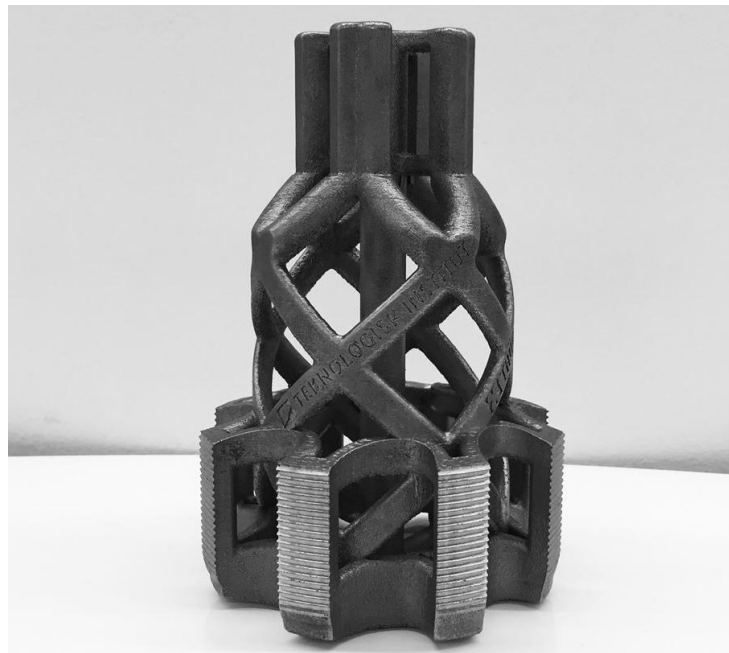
Additive manufactured thread gauge, 90% mass reduction
